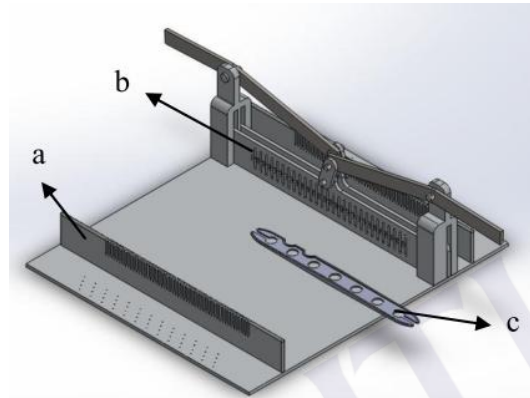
Final concept sketch of weaving handloom; a-aligner, b-heald frame, c-shuttle
